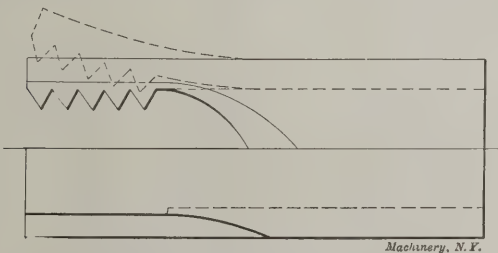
Effect of Improper Hardening of Spring Screw Threading Dies.
